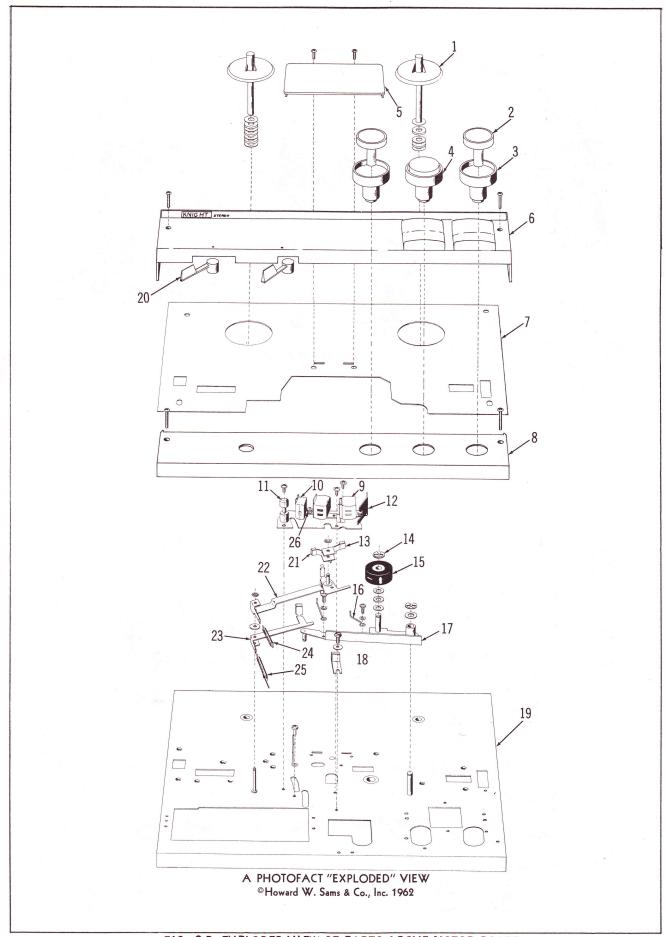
B EXPLODED VIEW OF PARTS ABOVE MOTOR BOARD
